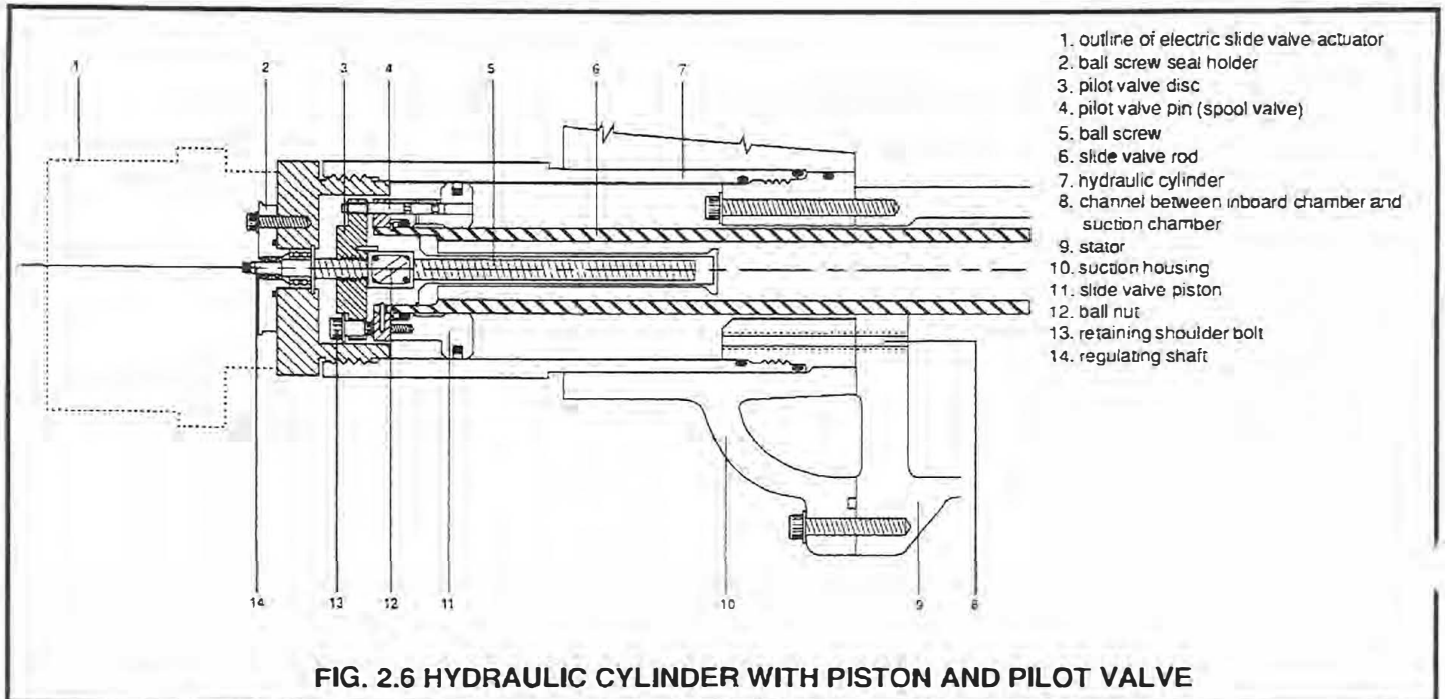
HYDRAULIC CYLINDER WITH PISTON AND PILOT VALVE
